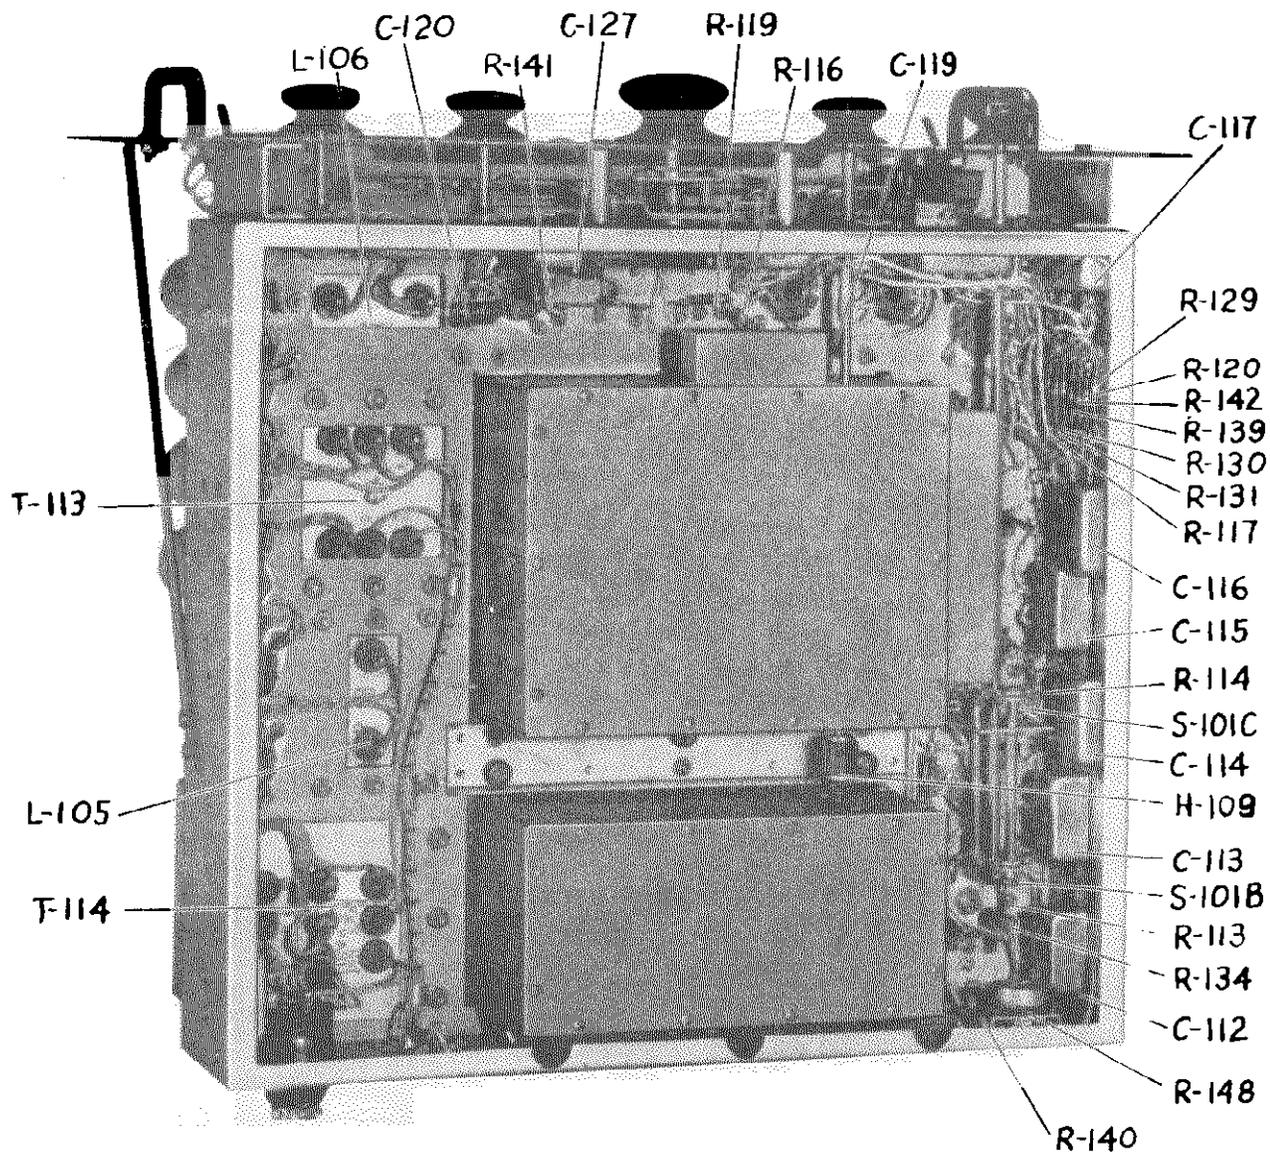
LEFT BOTTOM OBLIQUE VIEW, RADIO RECEIVER CHASSIS. BOTTOM COVER PLATE REMOVED.
